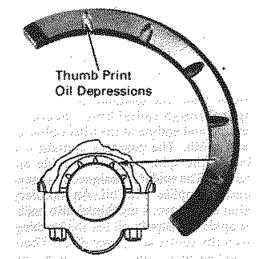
Crankshaft Thrust Collars (Two Collars For Each Engine)
